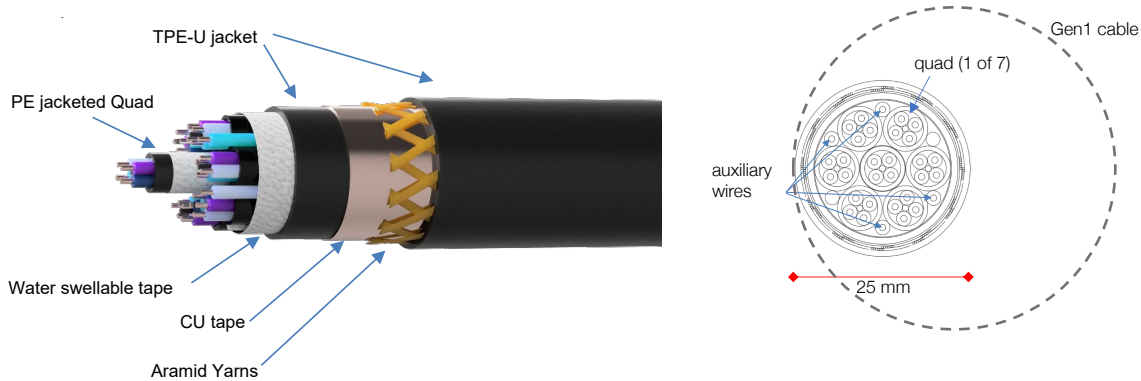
Diagram (left) and cross section (right) of the downhole Main Cable Assembly. The size of the original IceCube cable is shown for reference.
